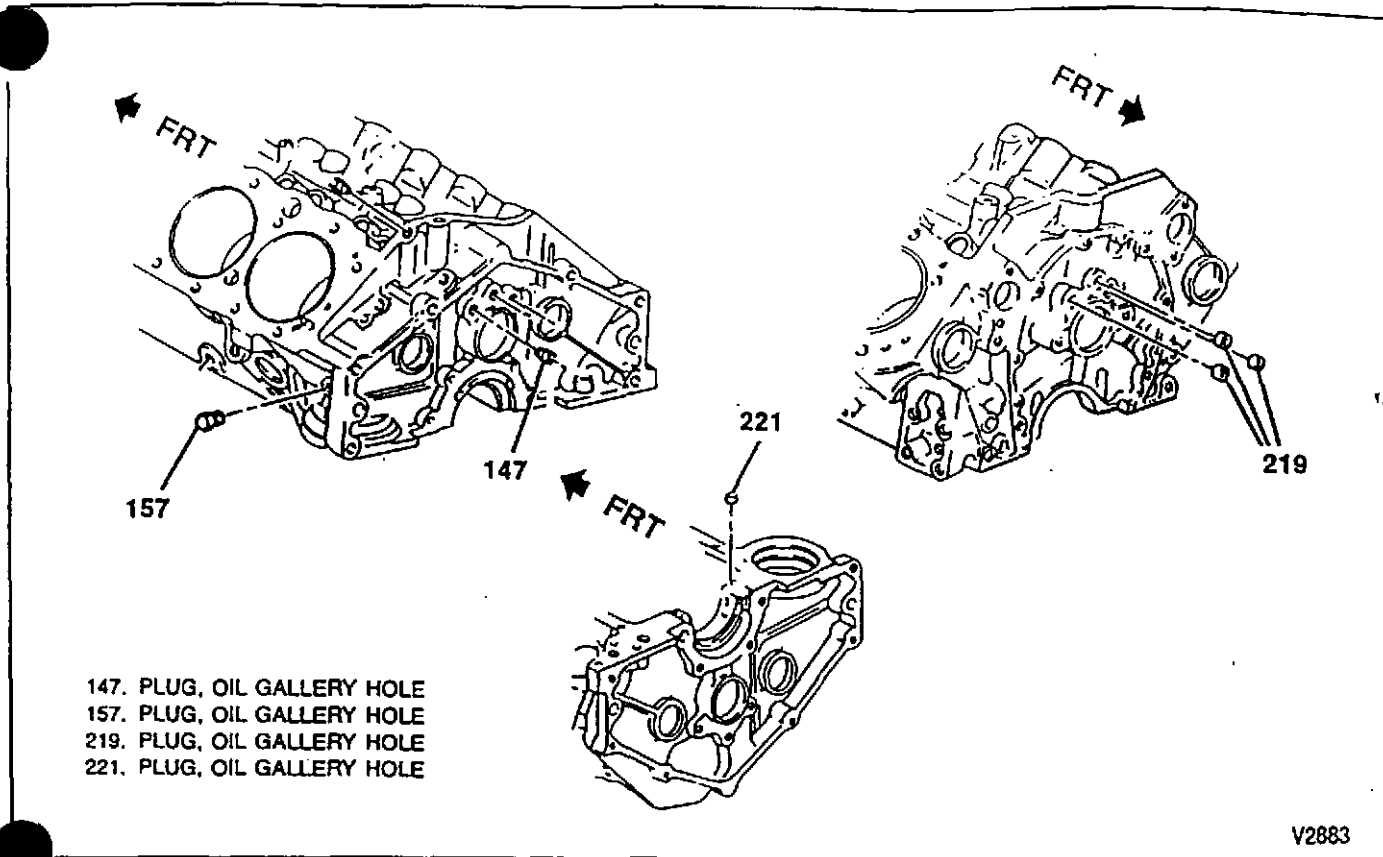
Engine Block Oil Gallery Hole Plugs (5.0L and 5.7L Engines)
